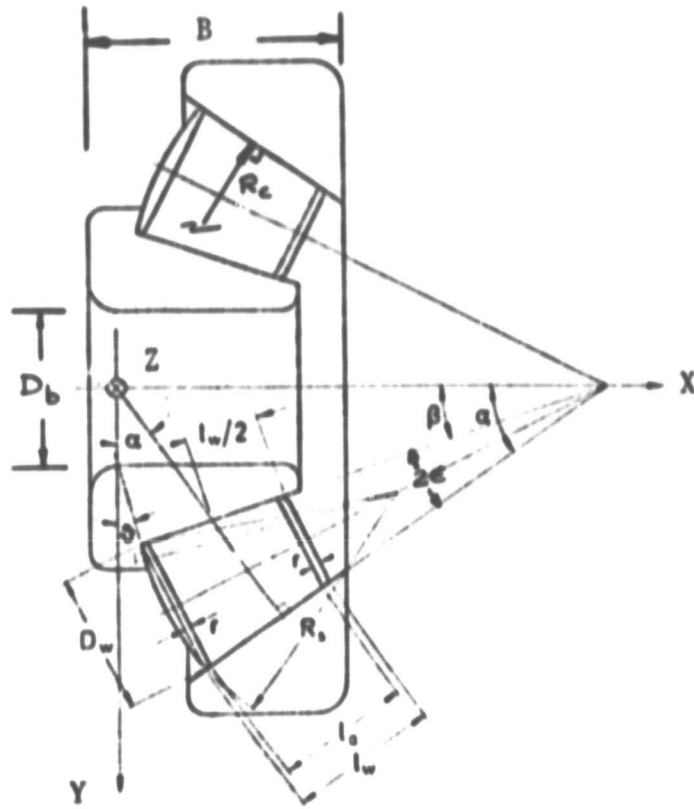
Tapered Roller Bearing with Characteristic Geometrical Dimensions
